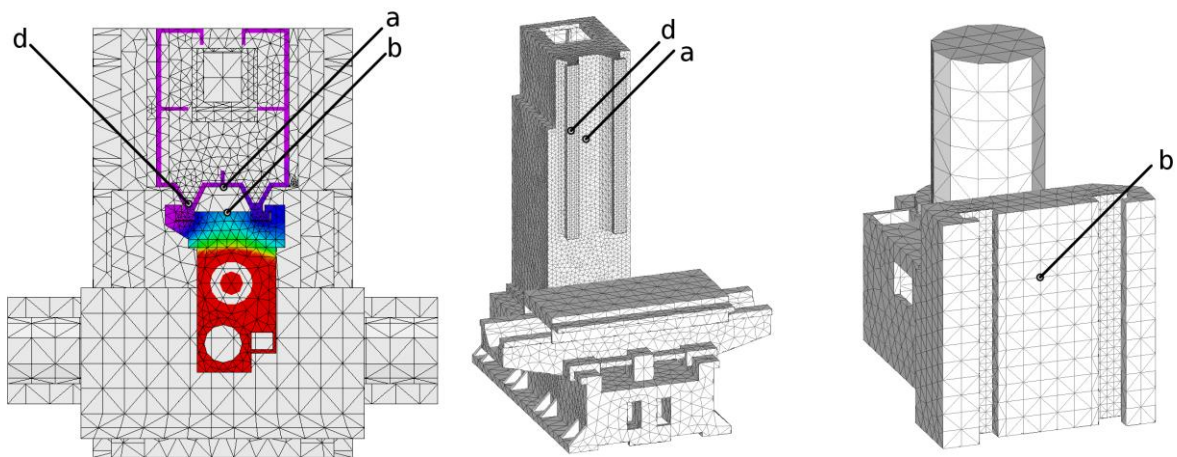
Top view of machine tool FEM model with separated column and headstock. a,b,c – temperature measurement points
